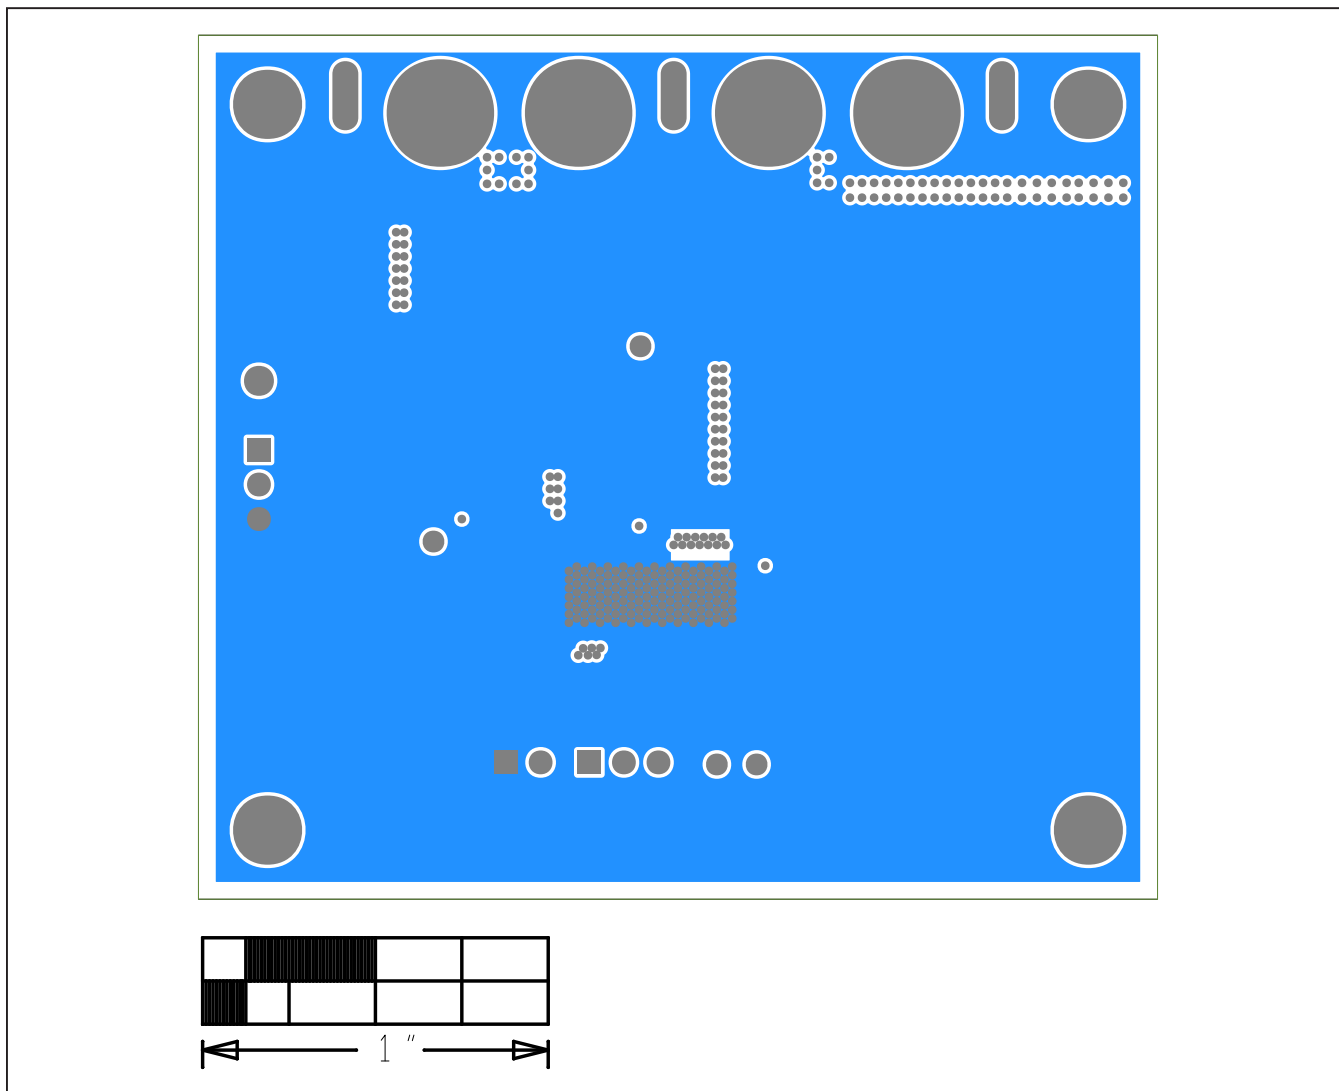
MAXM17546 5V Output EV kit PCB Layout—Bottom Silkscreen
